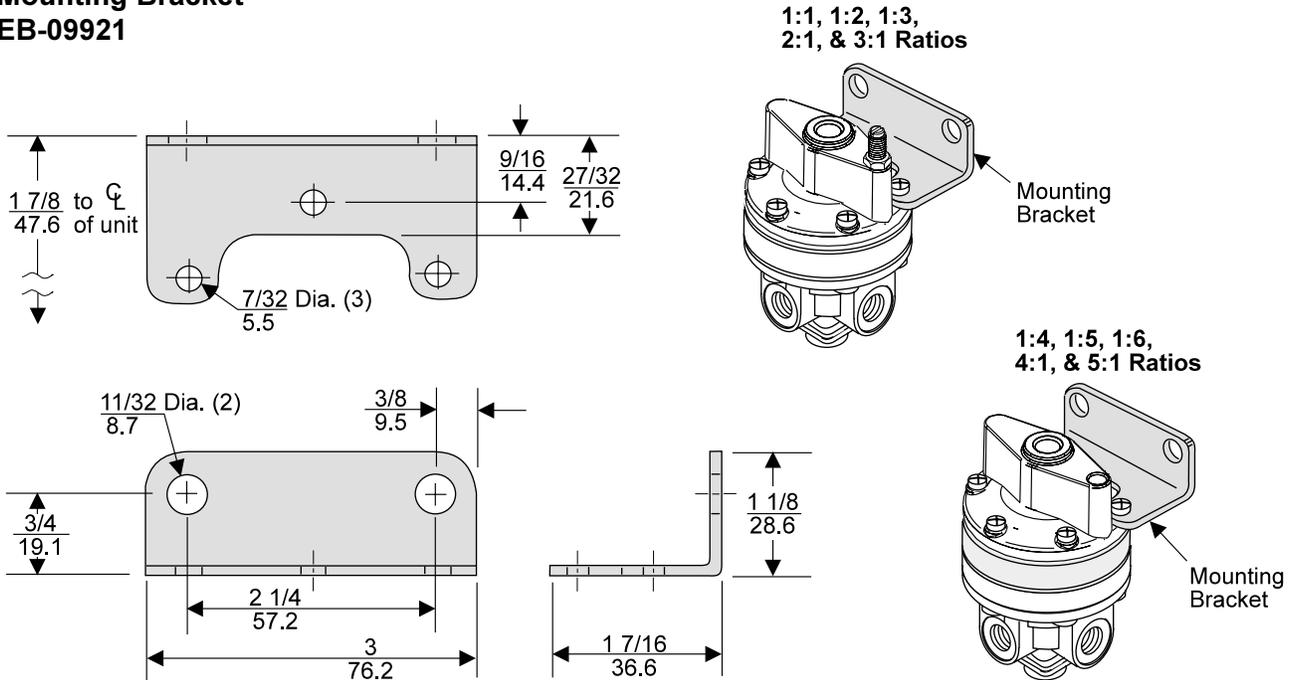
Mounting Bracket EB-09921 shown with Model 20 Booster. (Sold Separately)
